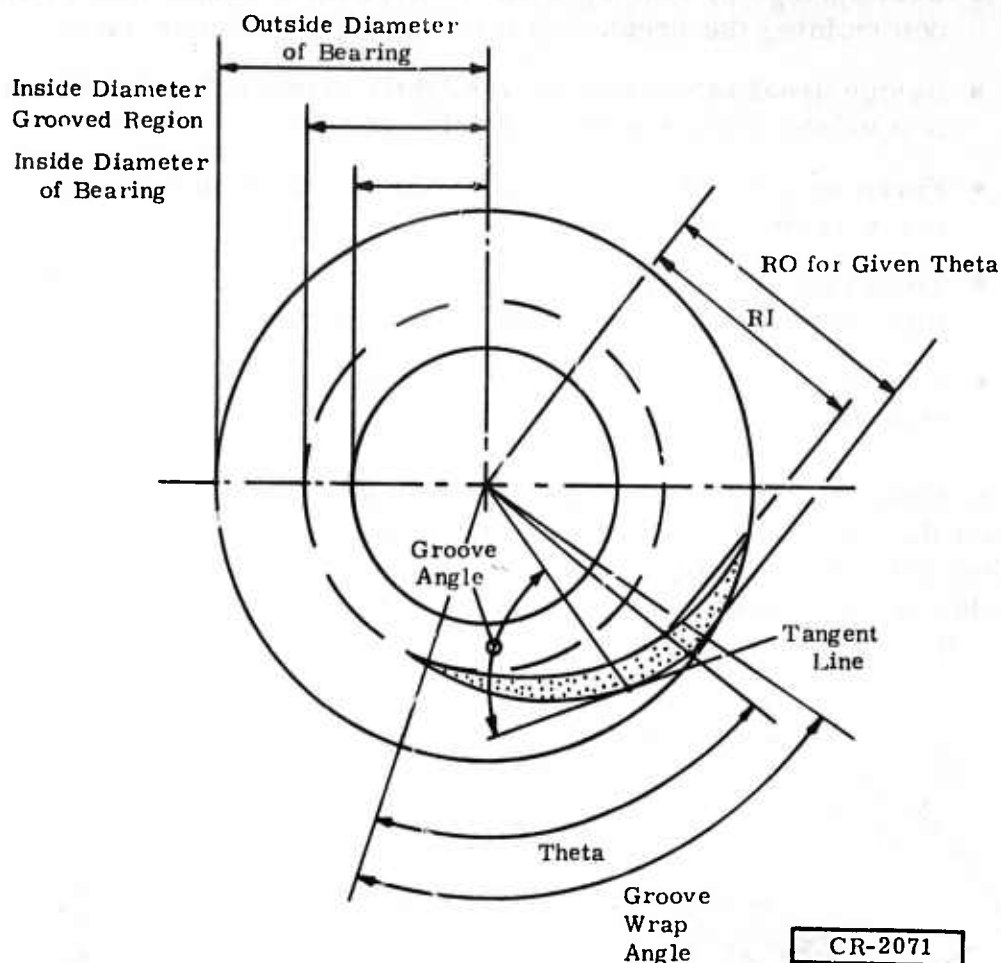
Geometry Showing Radial and Angular Coordinates for Drawing Logarithmic Spiral Grooves in Flat Thrust Face
